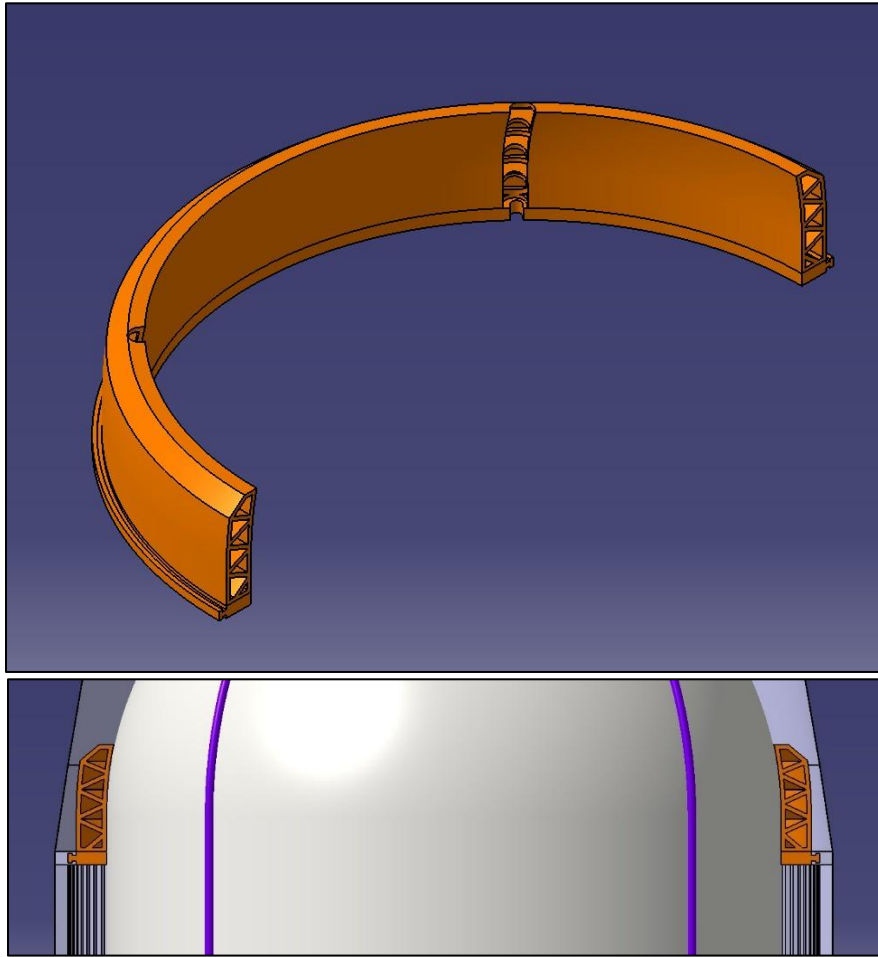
The Isometric view of Top Ring Fixtures of Fuel Tank (Top) and Top Ring Fixture in Payload Bay (Bottom)
